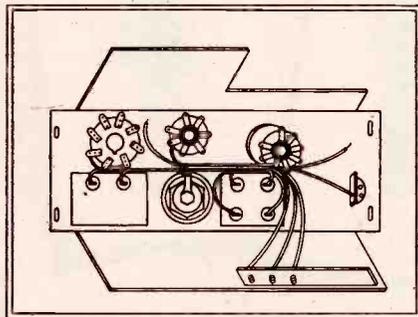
Chassis wiring in isometric view. Color can be used to show coded wires
